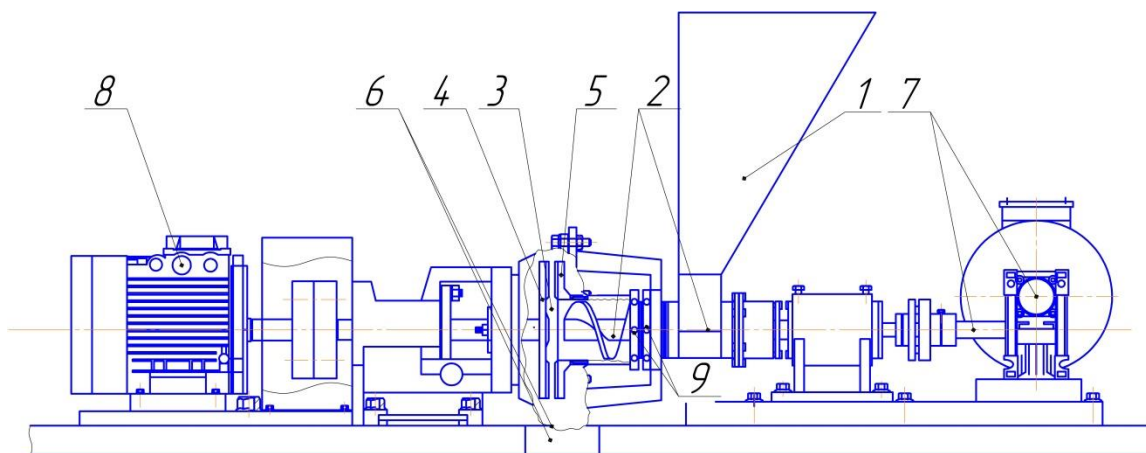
Disk refiner (1 – pulp hopper; 2 – screw feeder; 3 – refining zone; 4 – rotor disk; 5 – stator disk; 6 – outlet; 7 – screw feeder worm gear; 8 – electric motor of disk refiner rotor drive; 9 – mechanical adjusting device)
